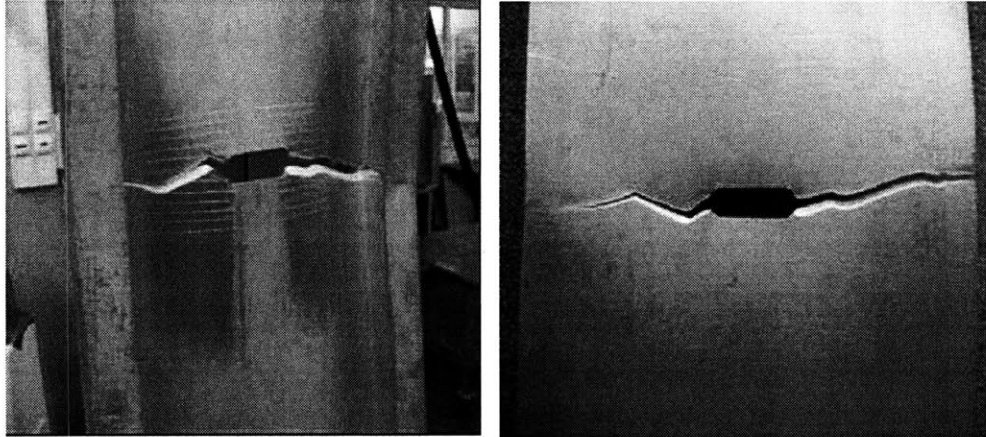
Front view of the TSCCT specimen (left) and rear view (right) showing the crack path
